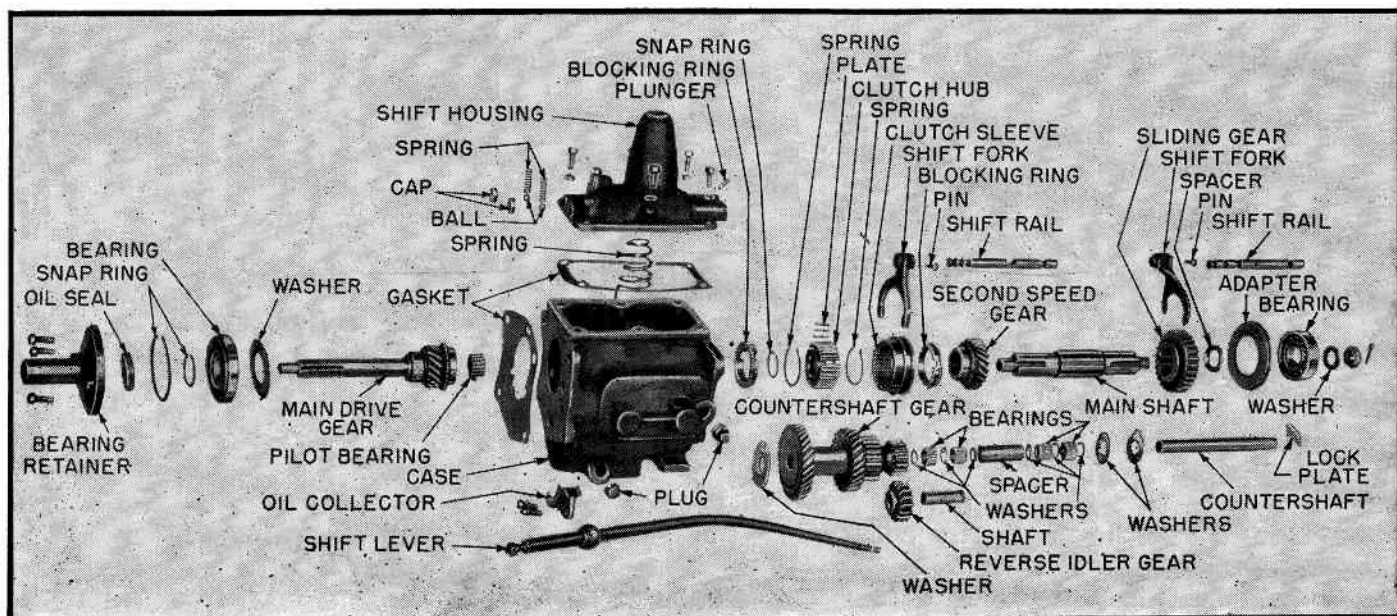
Exploded view of transmission. Jeeps and four-wheel drive Station Wagons
